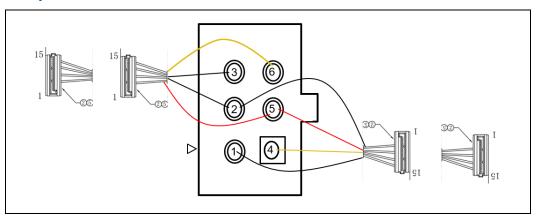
3 mm SATA Power 6 Pin Cable Connector – Traditional Cable Diagram
